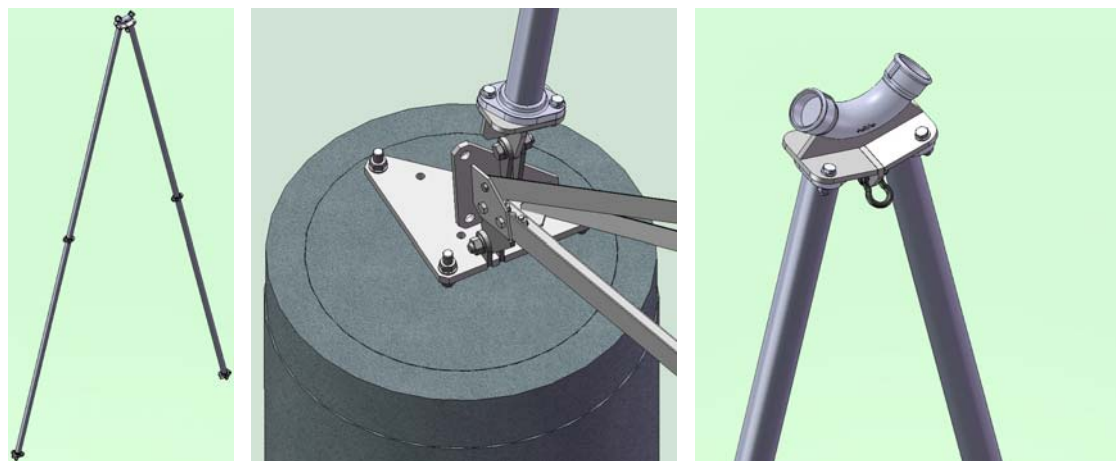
yoke, connection of bottom bracket with towerfoot, top bracket
